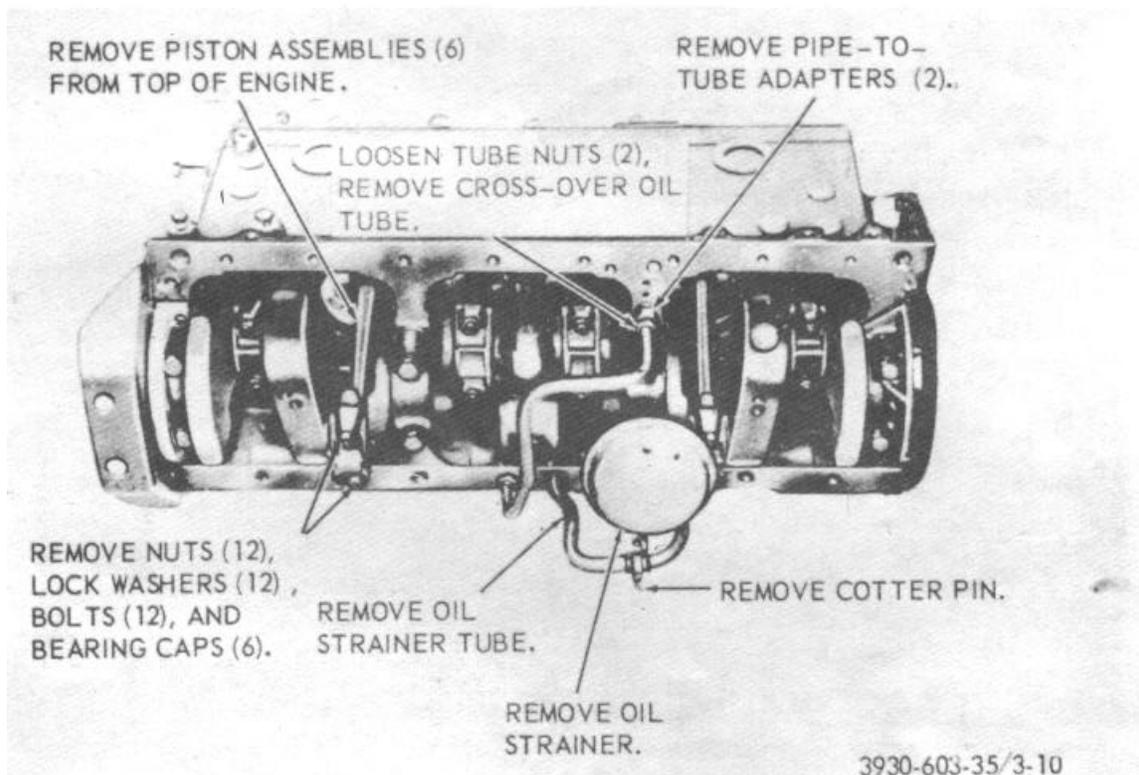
Oil strainer, oil lines, piston and connecting rod, removal and installation.
